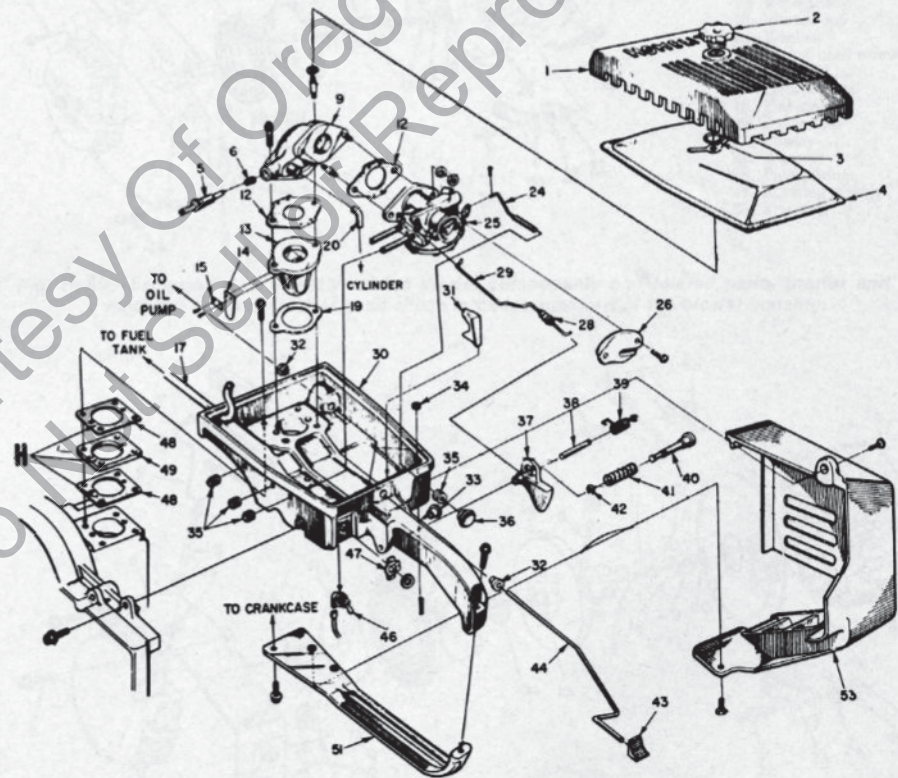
Exploded view of air box assembly for S1050 Auto and S1130G. Note idler air (speed) adjusting screw (5) in elbow (intake manifold) (9). Tube (20) is connected between intake manifold and cylinder transfer port. Align holes (H) in gaskets (48) and spacer (49) with holes in air box and crankcase as shown. Air filter element (4) has integral air box sealing gasket.
